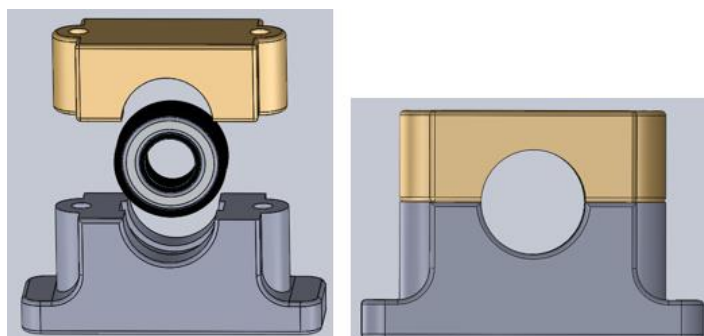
3D Model of Driveshaft Bearing Holder in Exploded and Assembled View
